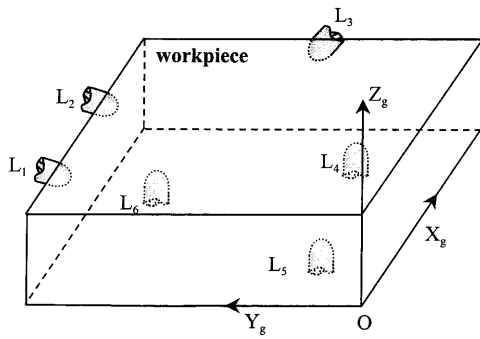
The workpiece fixture configuration used in the simulation study. L_1 – L_6 , the workpiece fixture locator contacts; X_g , Y_g , Z_g , the global coordinate frame.
